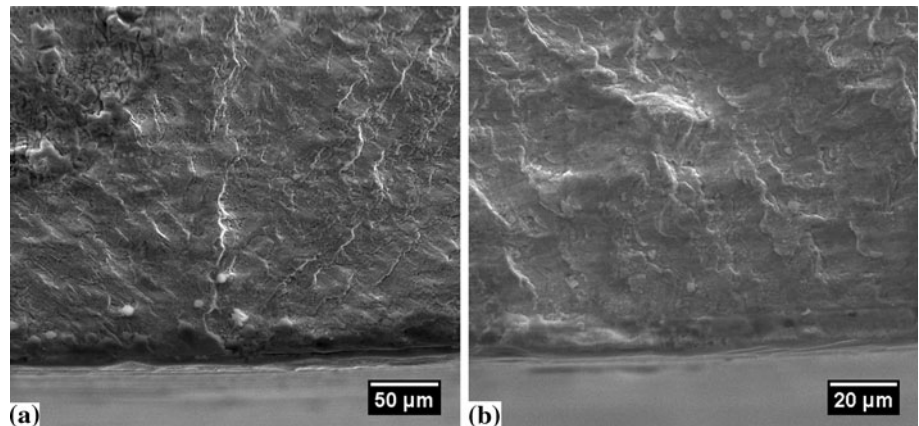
Fracture surface from a rotating bending fatigue test specimen. a $s_{\max} = 970$ MPa—250 \times , b $s_{\max} = 970$ MPa—250 \times
